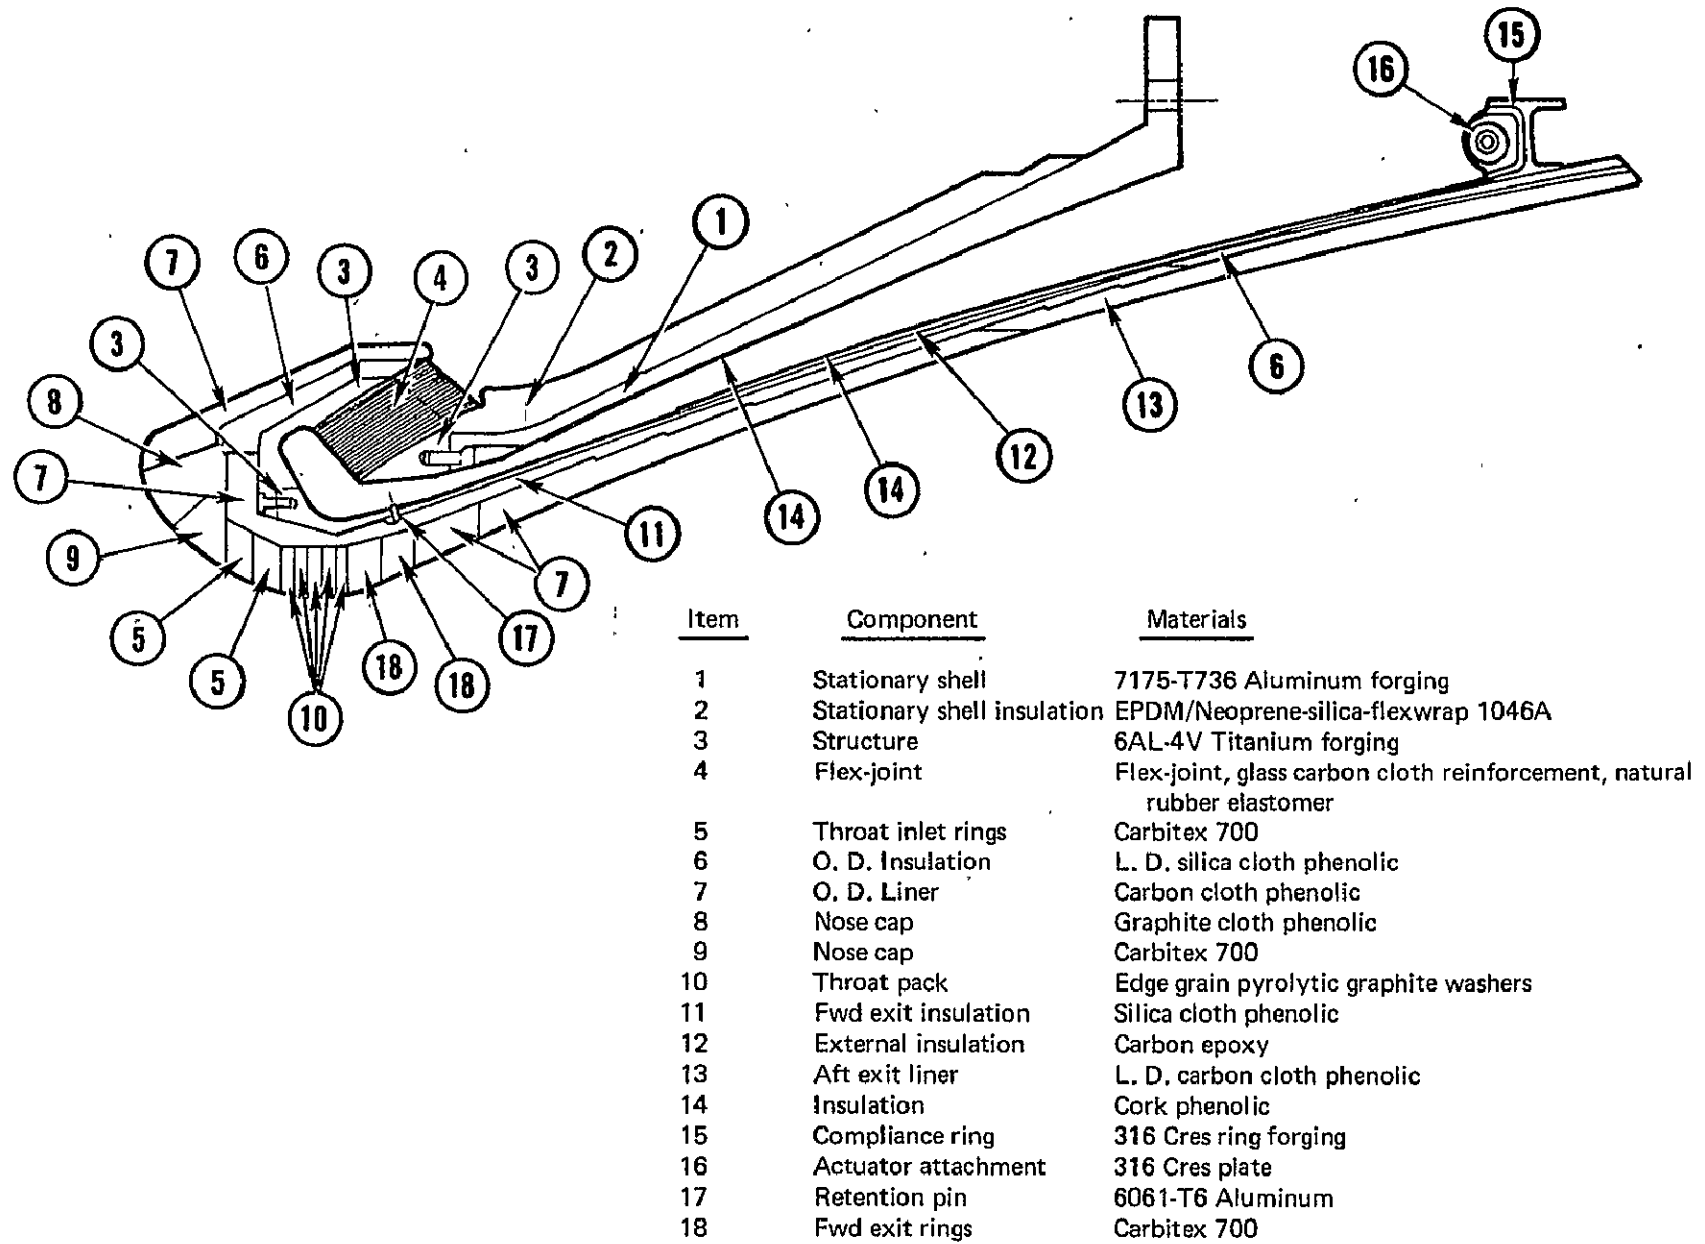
FIRST STAGE FLIGHT DESIGN NOZZLE
